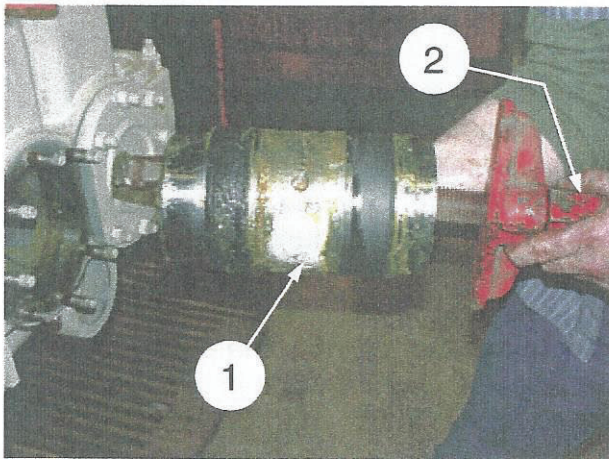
Mud Pump Liner Assembly; When the nut [2] on the puller rod has been tightened sufficiently to free the liner assembly [1], the puller and the liner assembly can be lifted out as shown.
